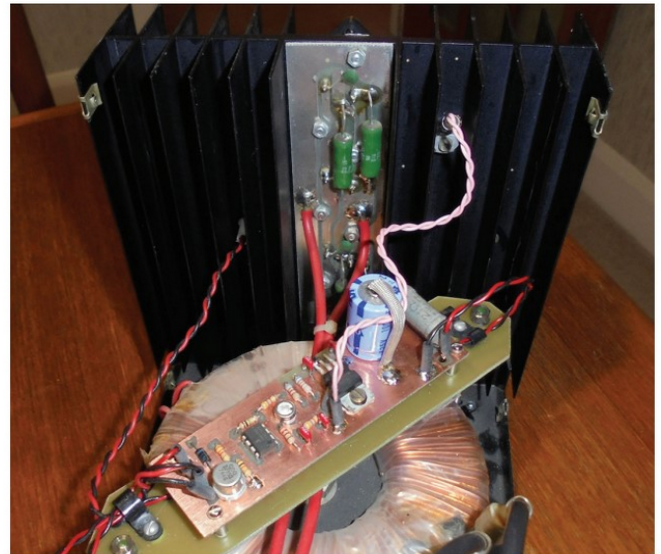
Close up picture of the PCB, note the pink thermistor wires.
